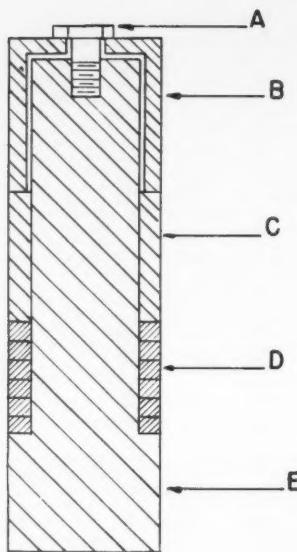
Schematic of assembly cathode. A. Bolt. B. Pressure cap. C. Section of 2½ inch OD pipe. D. ½ inch thick pipe sections. E. Steel mandrel.
